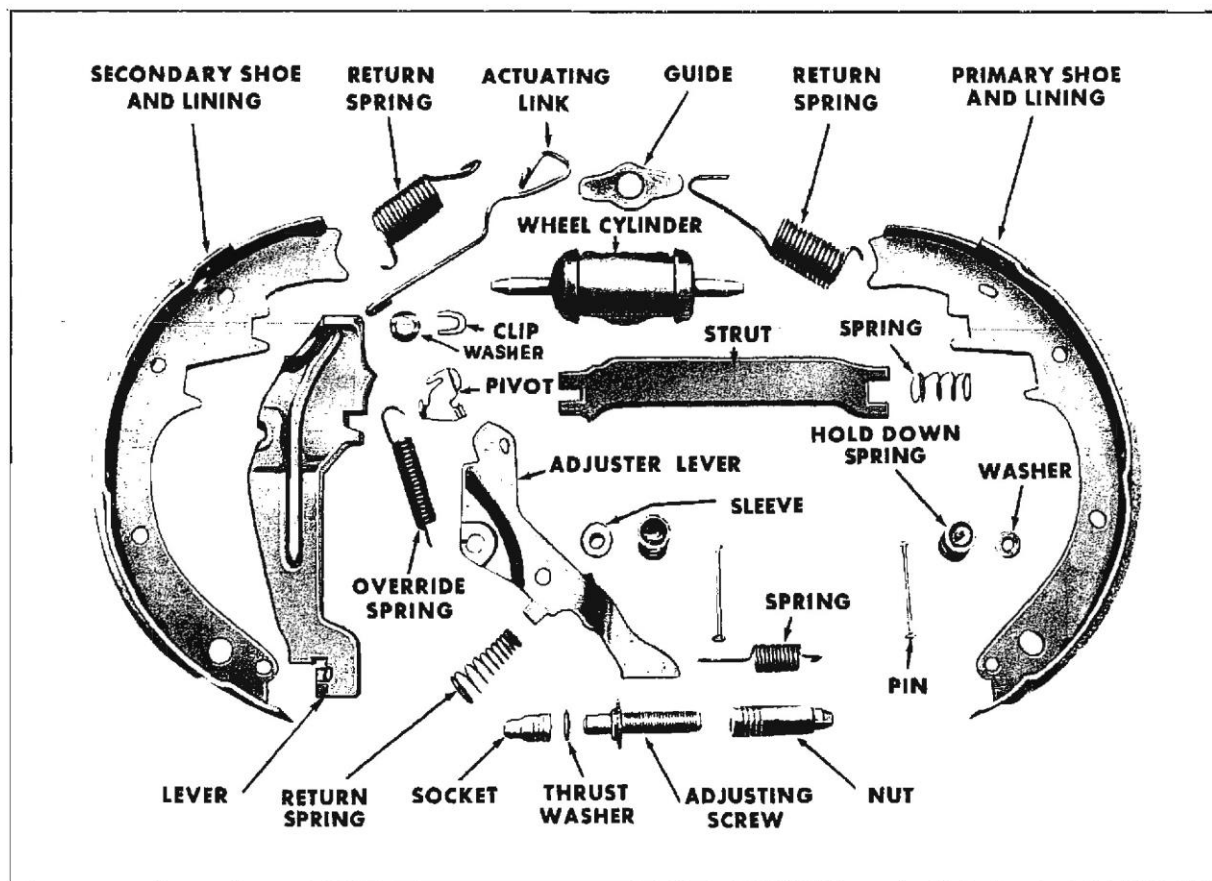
Self-Adjusting Brake Assembly — Exploded View
